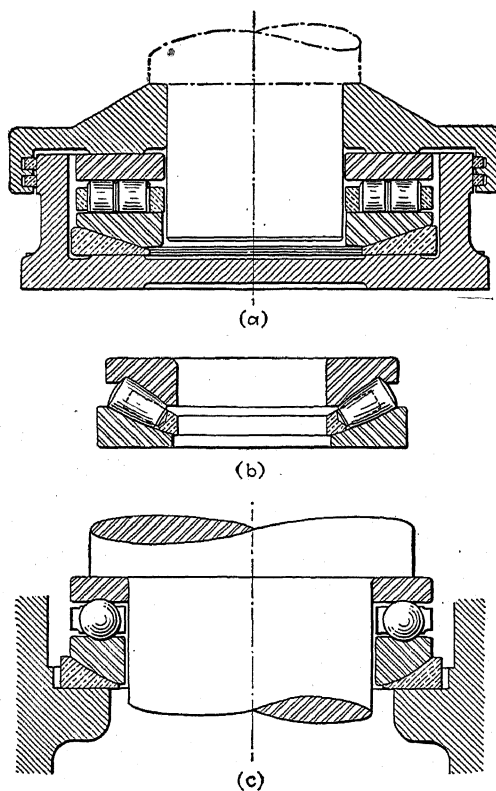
Thrust bearings. [(a) *Courtesy Bantam Ball Bearing Company*; (b) *courtesy SKF Industries, Inc.*]
